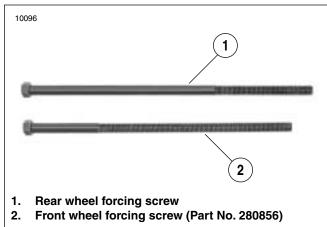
Forcing Screws Used for Front and Rear Wheel Bearing Installation
